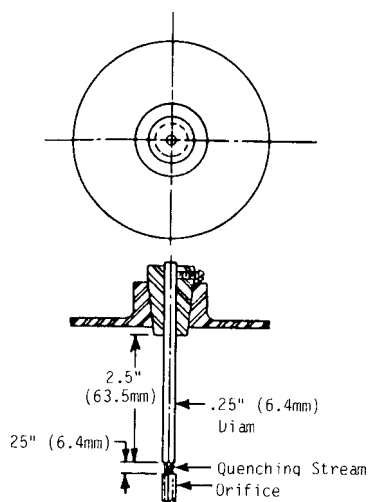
Support for Smaller-Size Specimens, Showing 0.25-in. (6.4-mm) Specimen in Position
